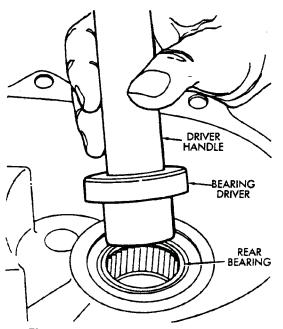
Installing Front Output Shaft Rear Bearing
